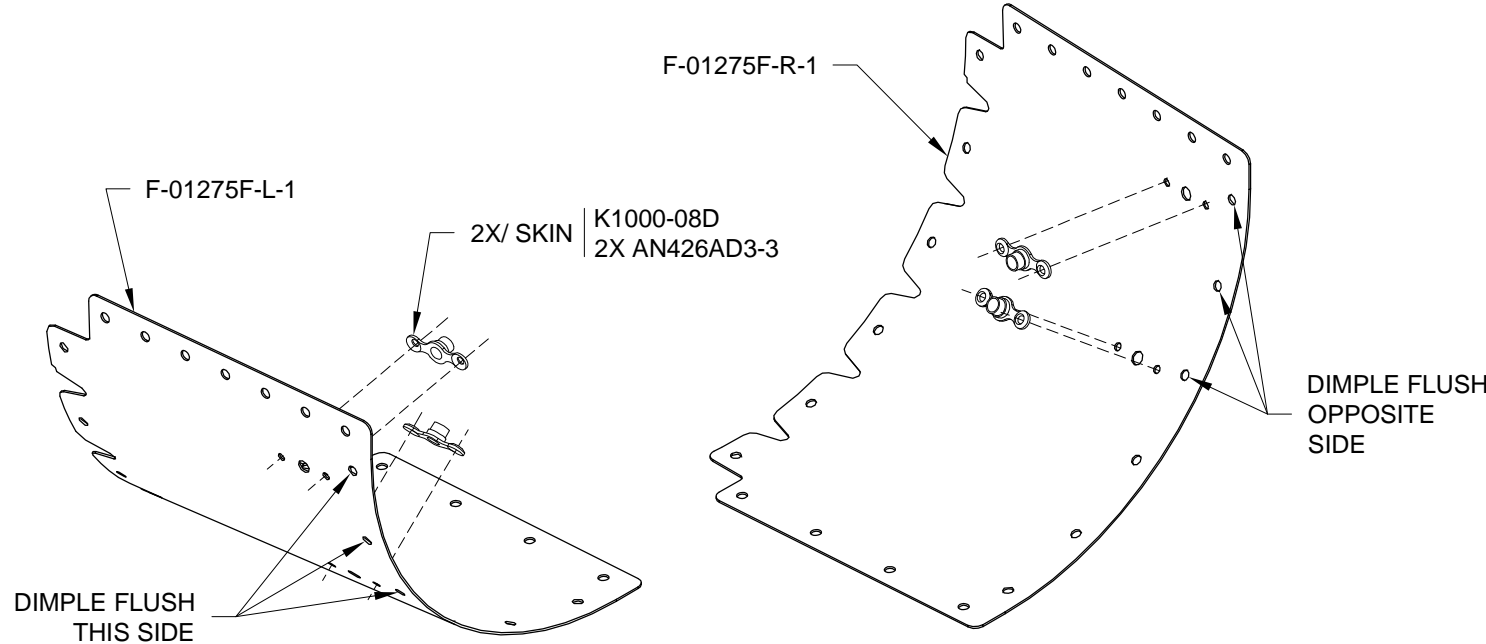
RIVETING NUTPLATES TO F-01275F-L-1 & -R-1
